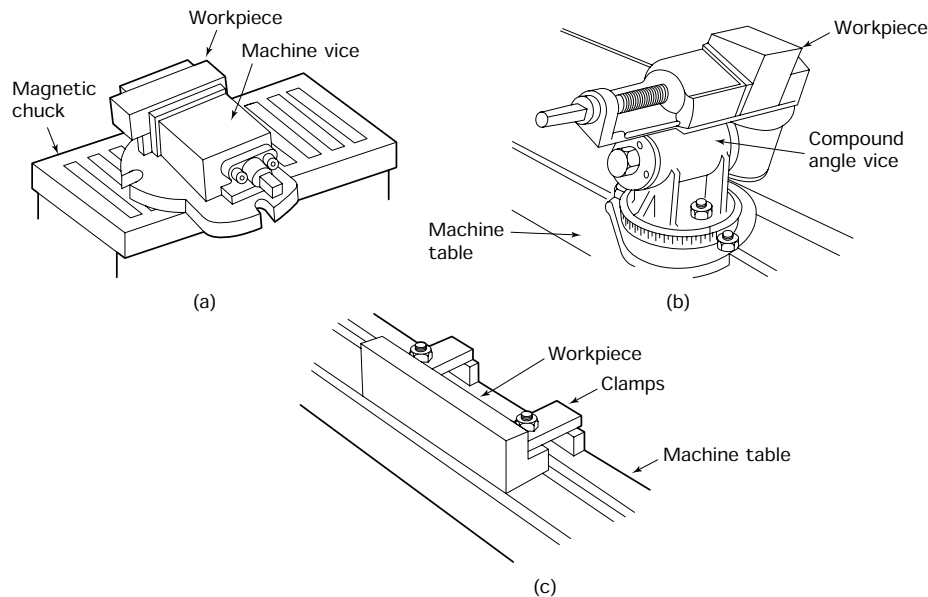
Mechanical clamping: (a) use of machine vice on a magnetic chuck; (b) use of a compound angle vice bolted directly to the machine table; (c) work clamped directly to machine table
